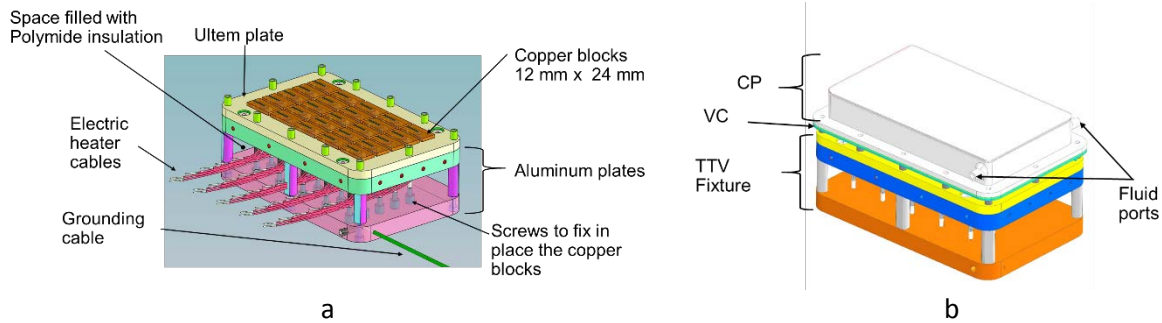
Thermal test vehicle: a) TTV fixture with copper blocks and electric heaters; b) Schematic of TTV-VC-CP assembly
